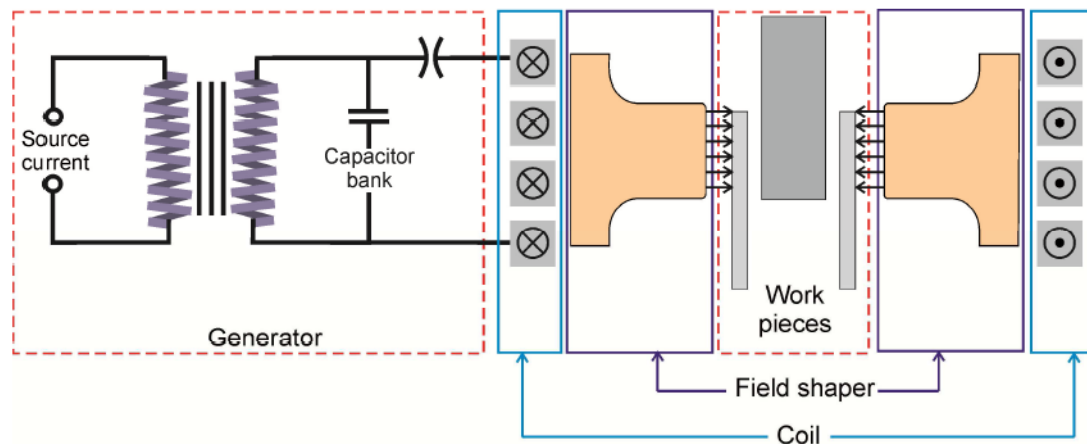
A typical MPW setup for tubular assemblies [20].
